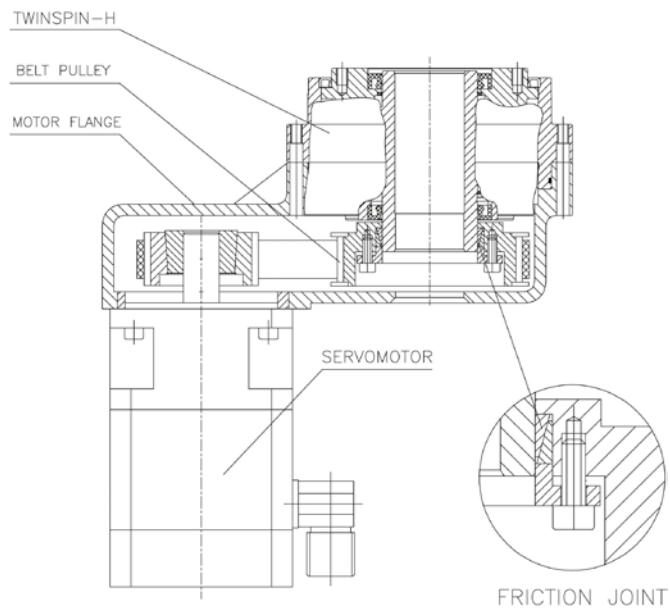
Connection of gear shaft with toothed pulley via the friction joint
